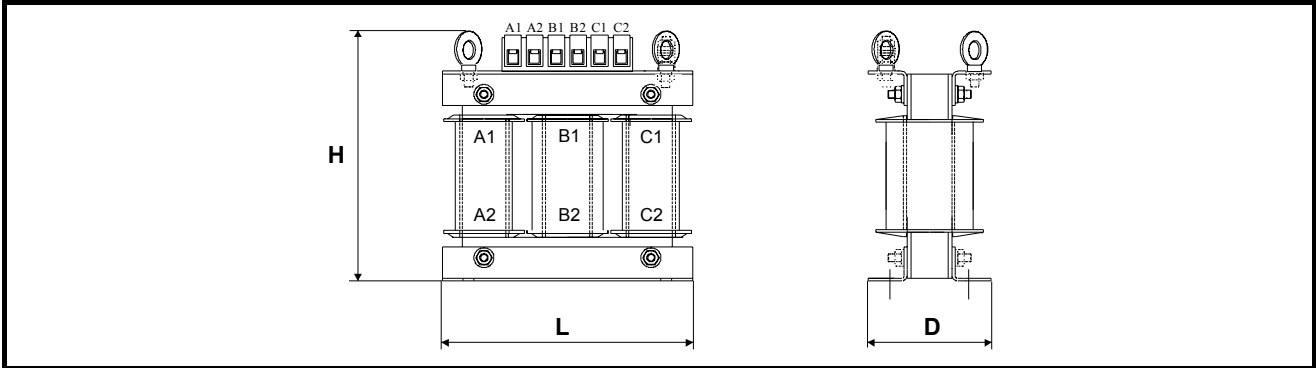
Switching frequency filter inductor type 2 dimensions
